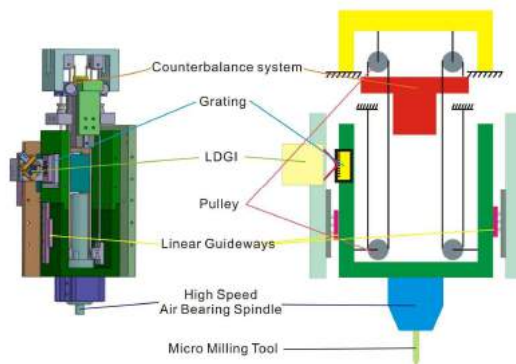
The high speed air bearing spindle clamp and driven mechanism in Z-axis.
